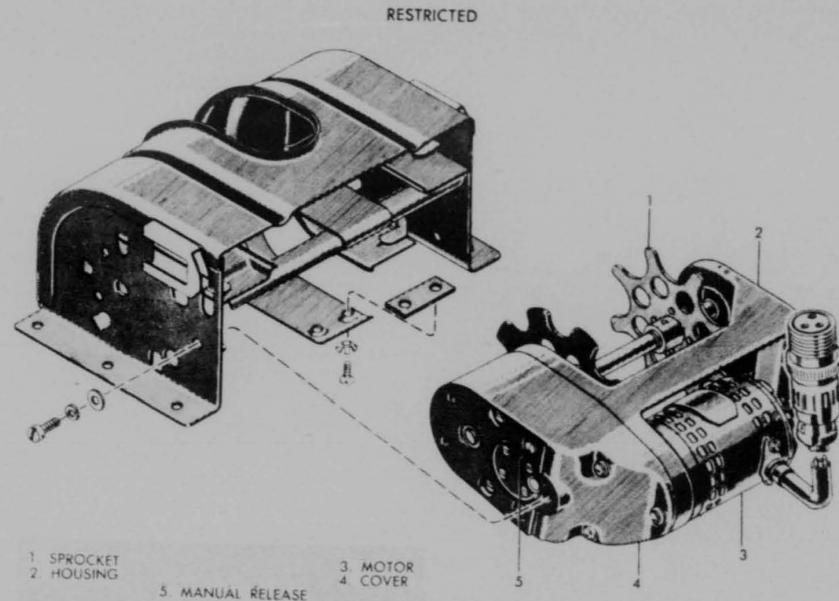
Ammunition Booster Assembly Partially Disassembled.
